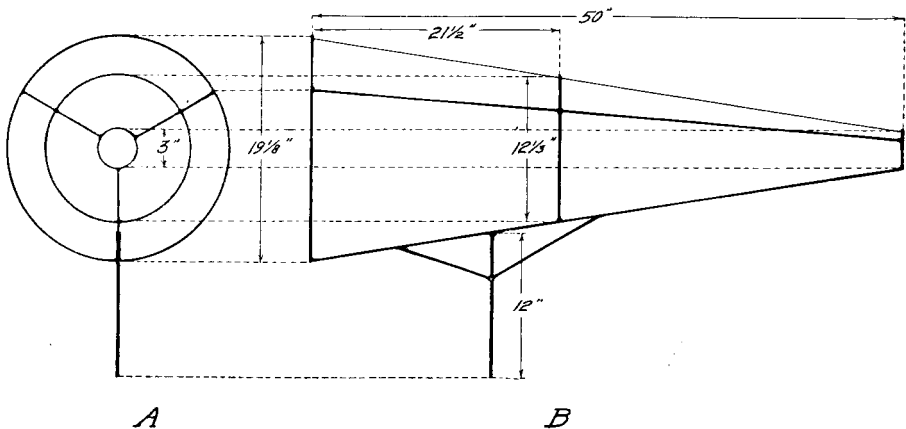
Diagram showing the dimensions and construction of the collecting net. The framework is of $\frac{1}{4}$ -inch iron rod and welded throughout, except for the 12-inch supporting arm, which is of $\frac{1}{2}$ -inch rod or pipe. A, Front view; B, side view. The net covering (not shown) is of 16-mesh screen wire with all seams soldered.
